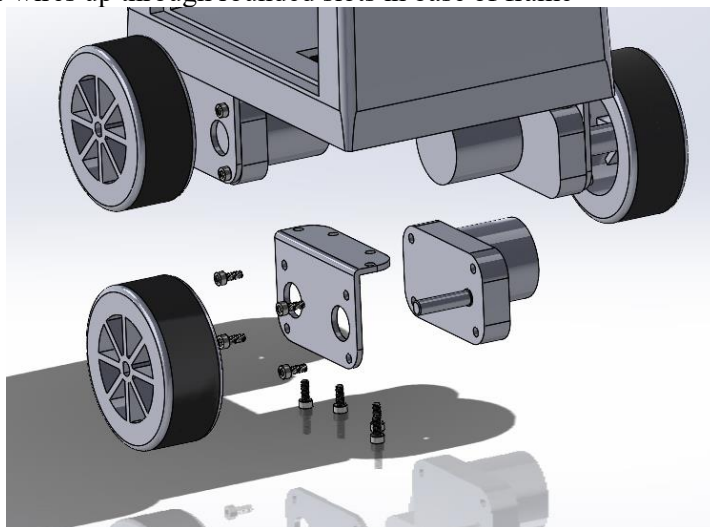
Single Motor Assembly Breakdown and proper wheel arrangement for Robot 1
